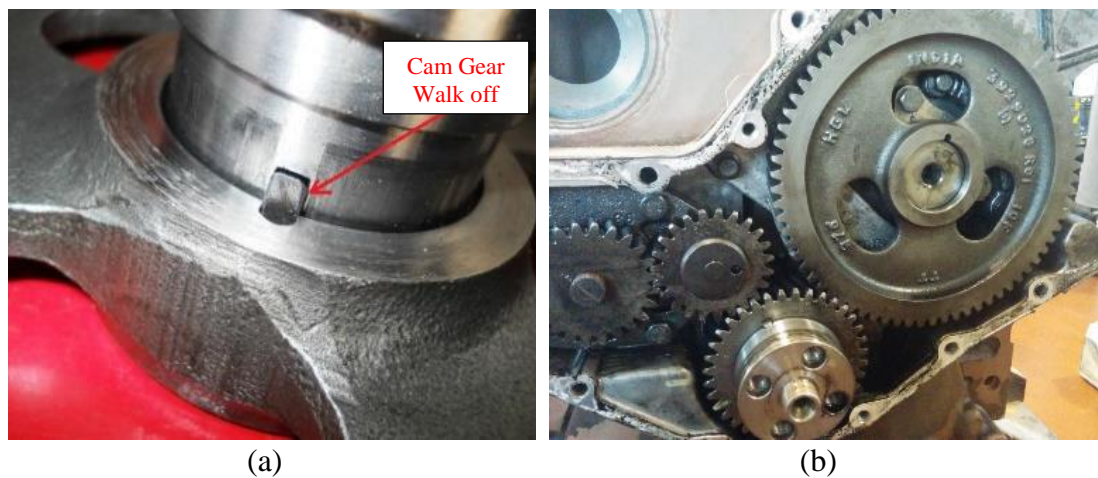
Picture showing (a) Cam gear walk-off and (b) Cam gear out of place
